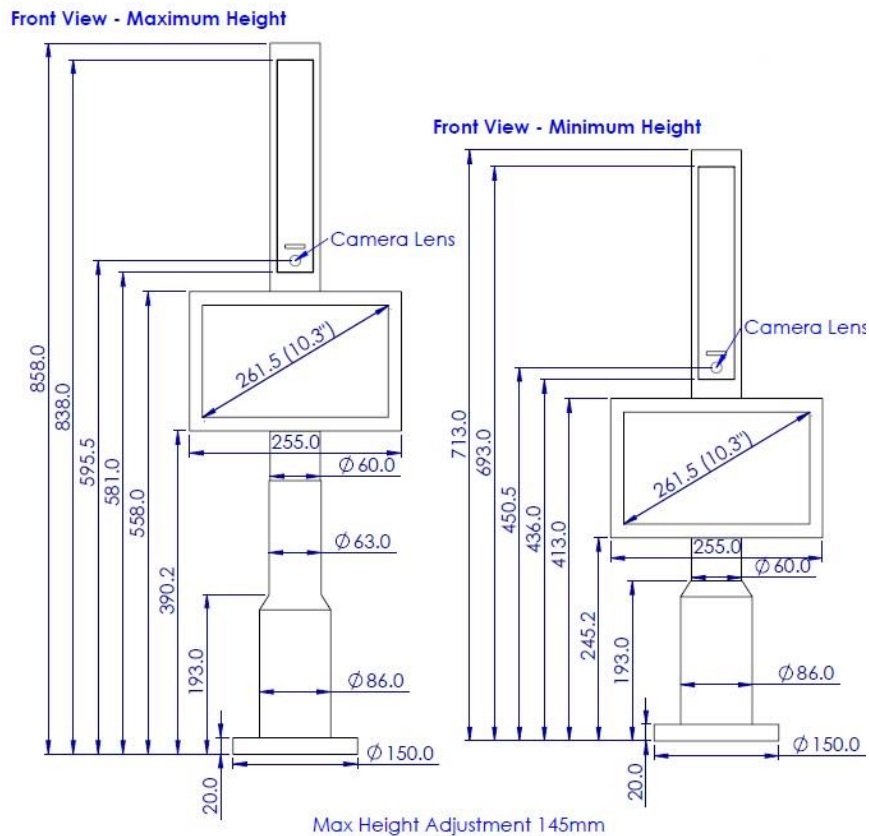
Dimensional drawing of the ASLOC 710 Landscape with base at minimum and maximum height of install showing camera position.
